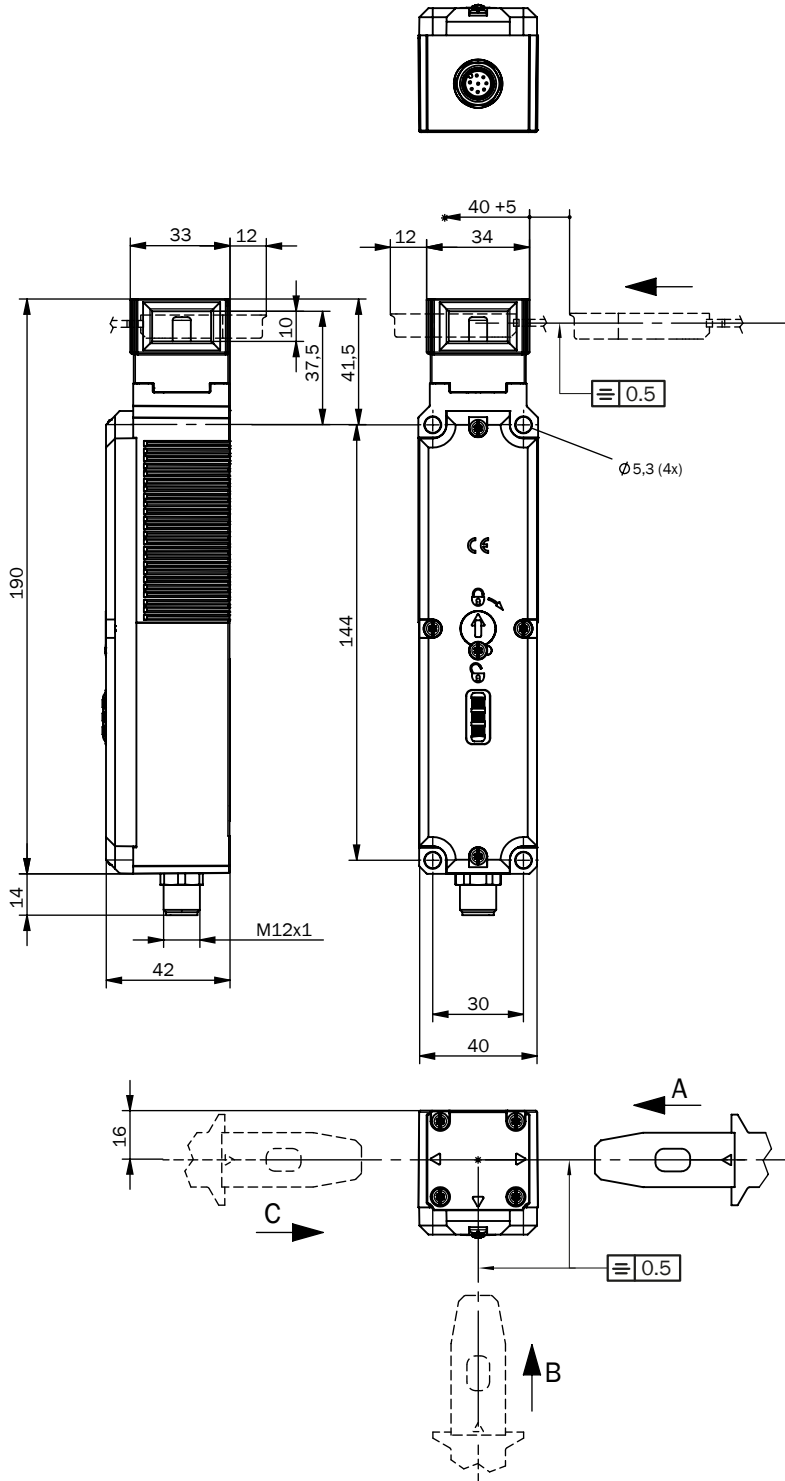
Dimensional drawing of TR110-SRUF00, TR110-SLUF00, TR110-SRUSA00 and TR110-SLUSA0000 safety switches (mm)
